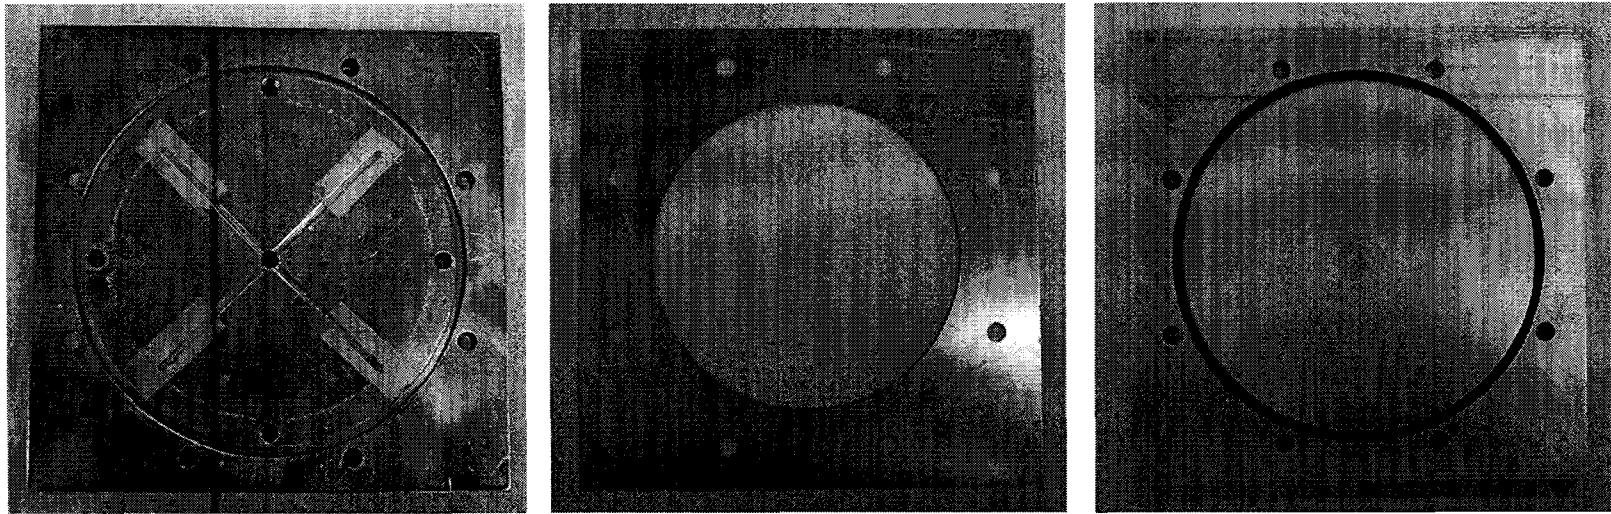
Photograph of the mold cavity components. Top mold wall with two flow channels (left), spacer plate (center), and bottom mold wall (right)
